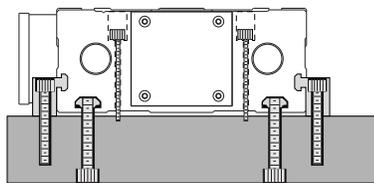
Mounting from below using T-slots or from above through mounting holes.
